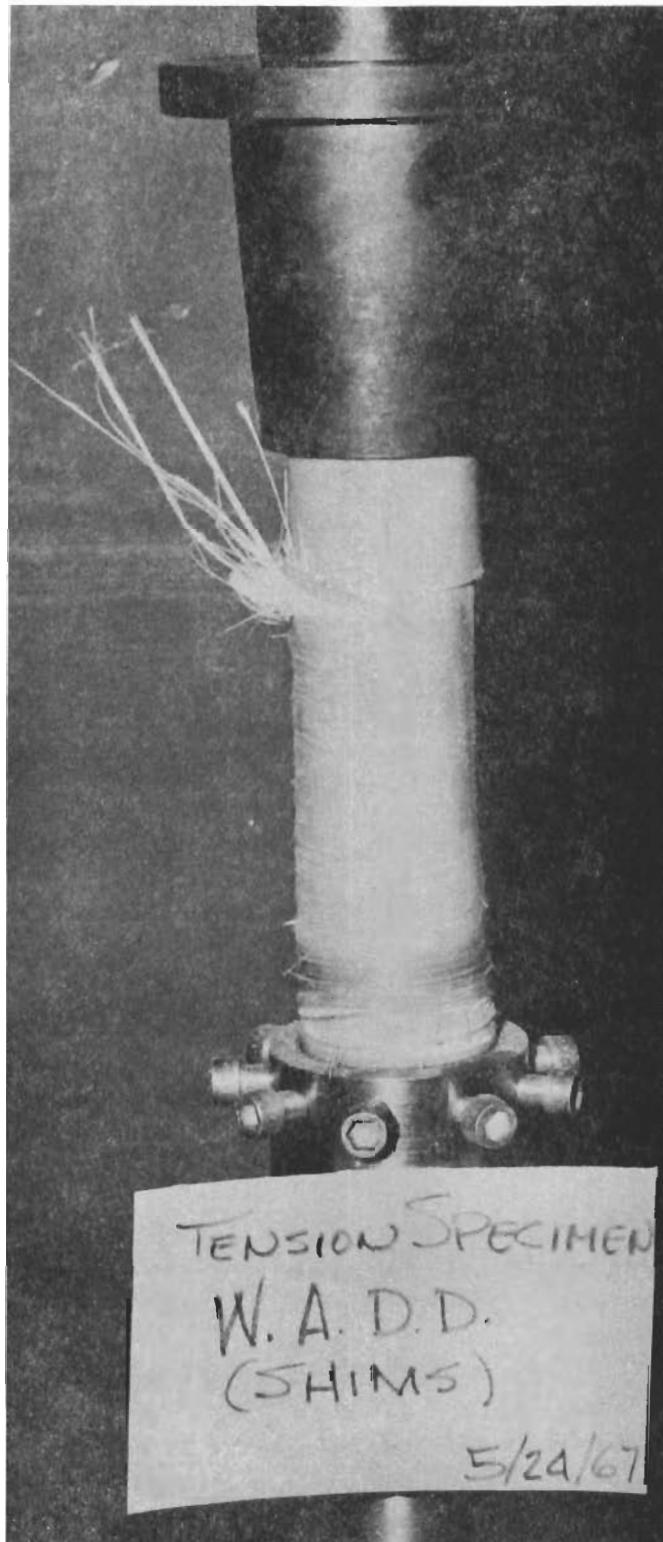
Tubular Shim Joint Specimen-After Tension Test
